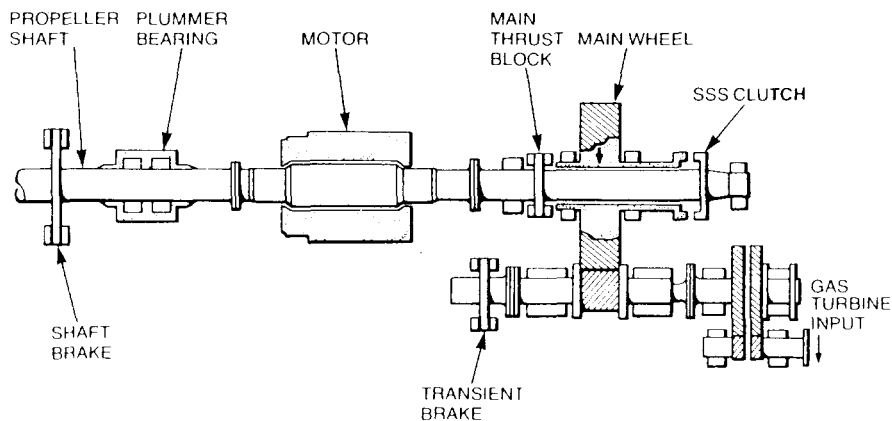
ARRANGEMENT OF MOTOR AND GEARBOX (PORT SHAFT)
